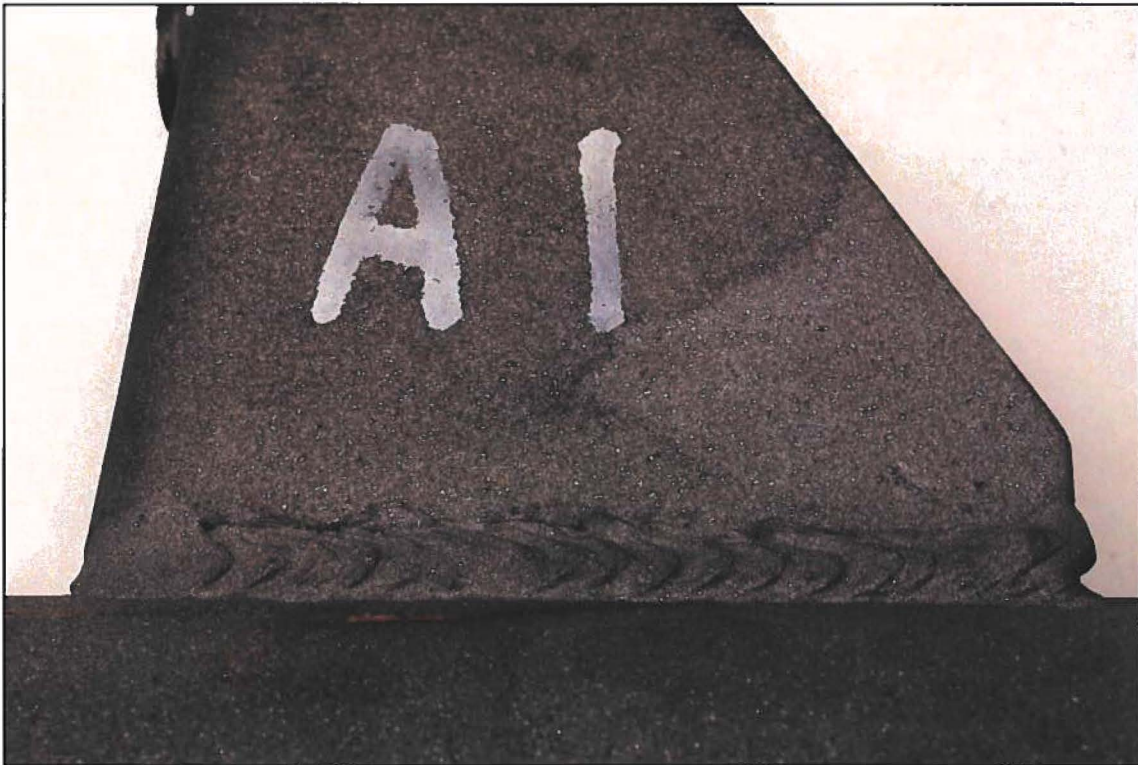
Image of the Lug A1 exterior top weld which exhibited substantial fusion except for some overlap, spatter and porosity.
